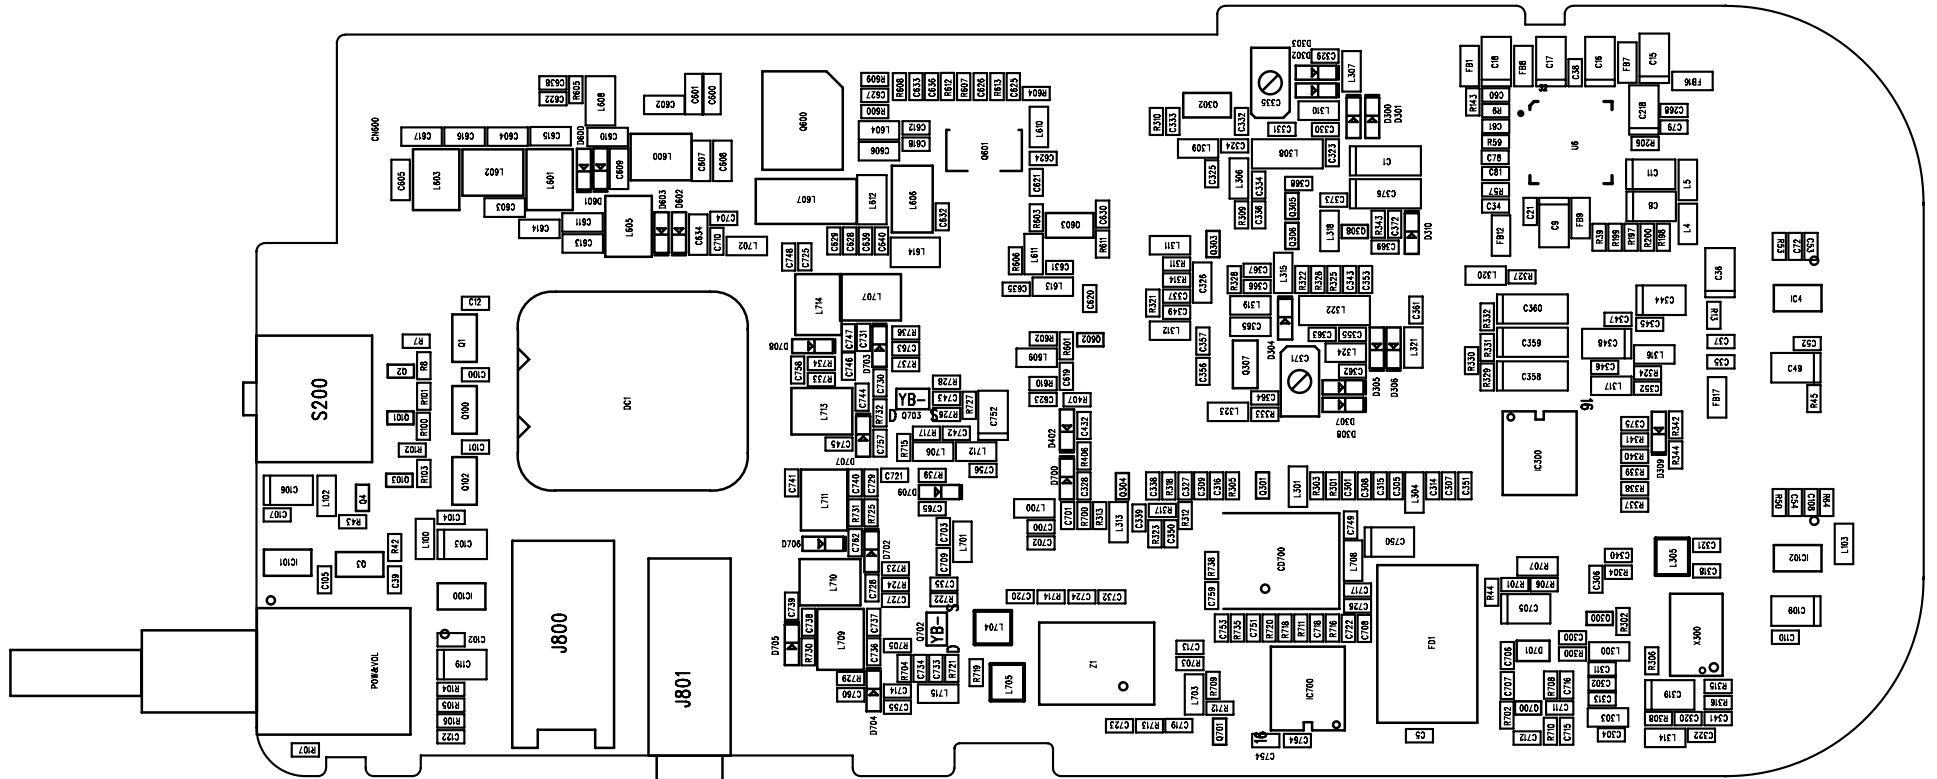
FP560-02 Bottom PCB Position Mark Diagram (400-470MHz)
